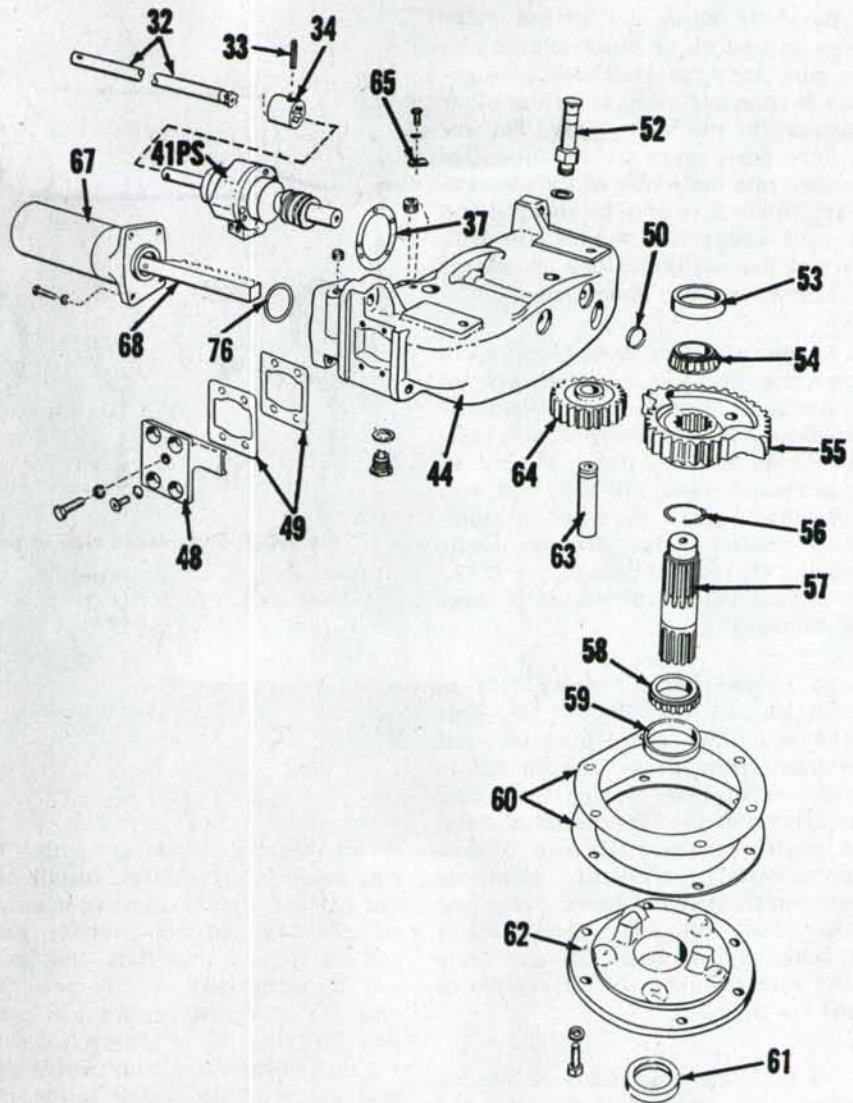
Partially exploded view of the power steering front support. For exploded views of the control valve unit (41PS) and ram (67), refer to Fig. AC14 and Fig. AC15 respectively.
